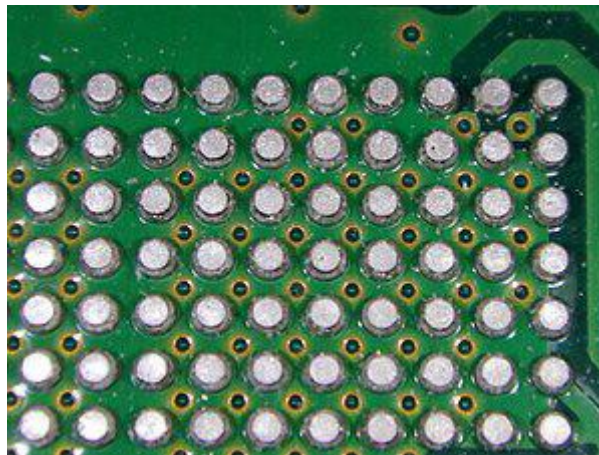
Fig.A grid array of solder balls under an integrated circuit chip, with the chip removed; the balls were left attached to the printed circuit board.
